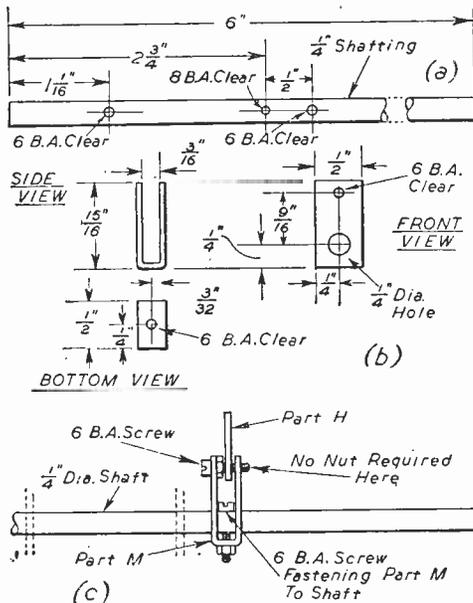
(a) and (b).—Details of shafting, and its mount. (c) How part M is fixed to the 1/4 in. spindle.
